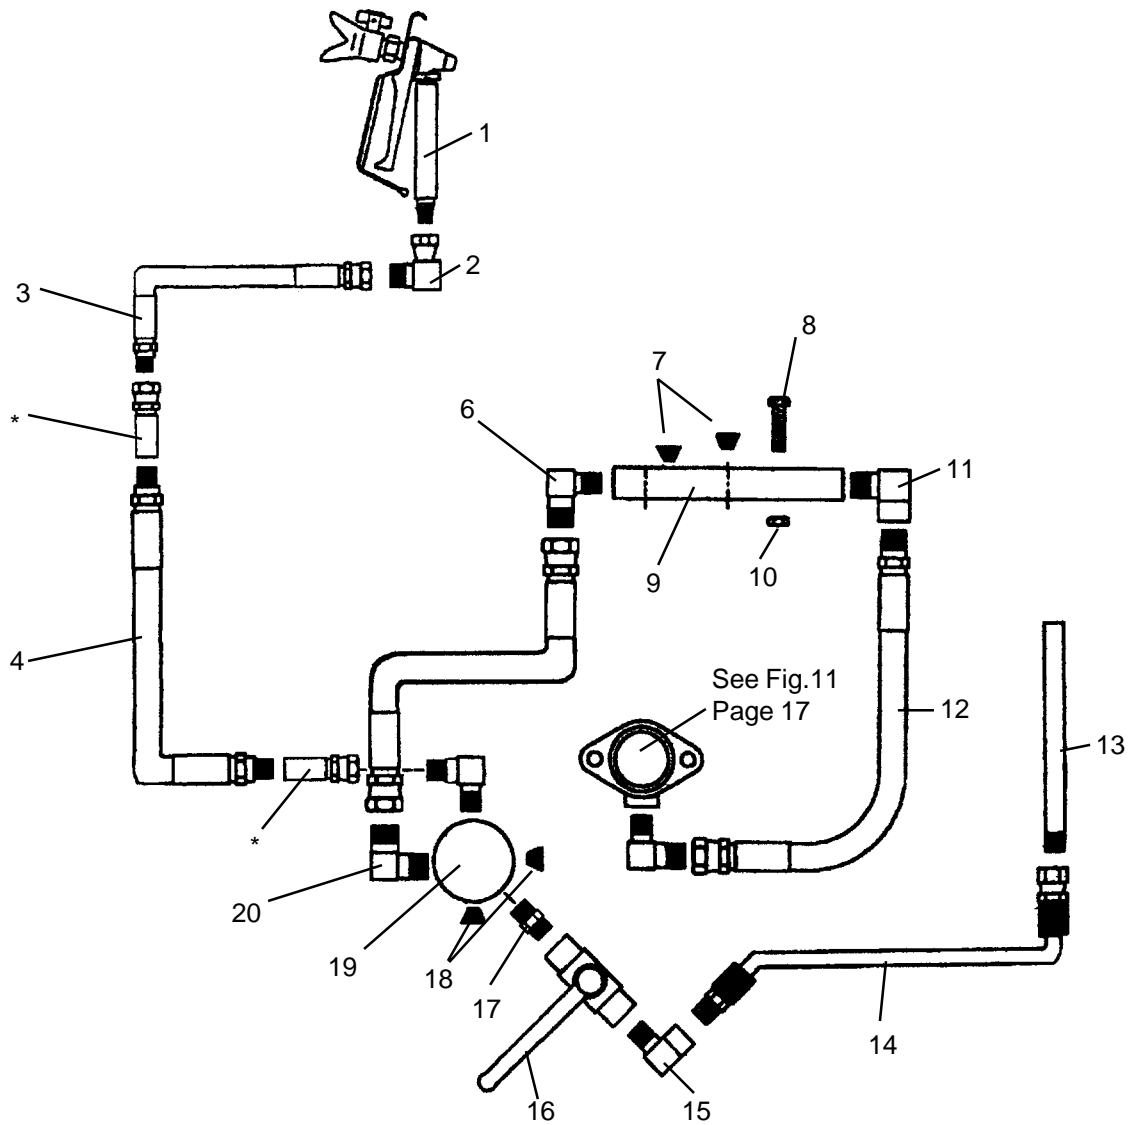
PARTS LIST, PAINT SYSTEM ASSEMBLY
